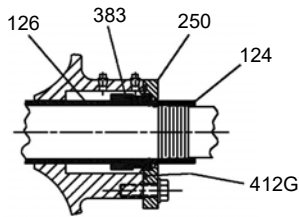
Casing ring and optional impeller ring detailMechanical seal stuffing box optionFigure 61: Mechanical seal stuffing box option8.2 Parts list
